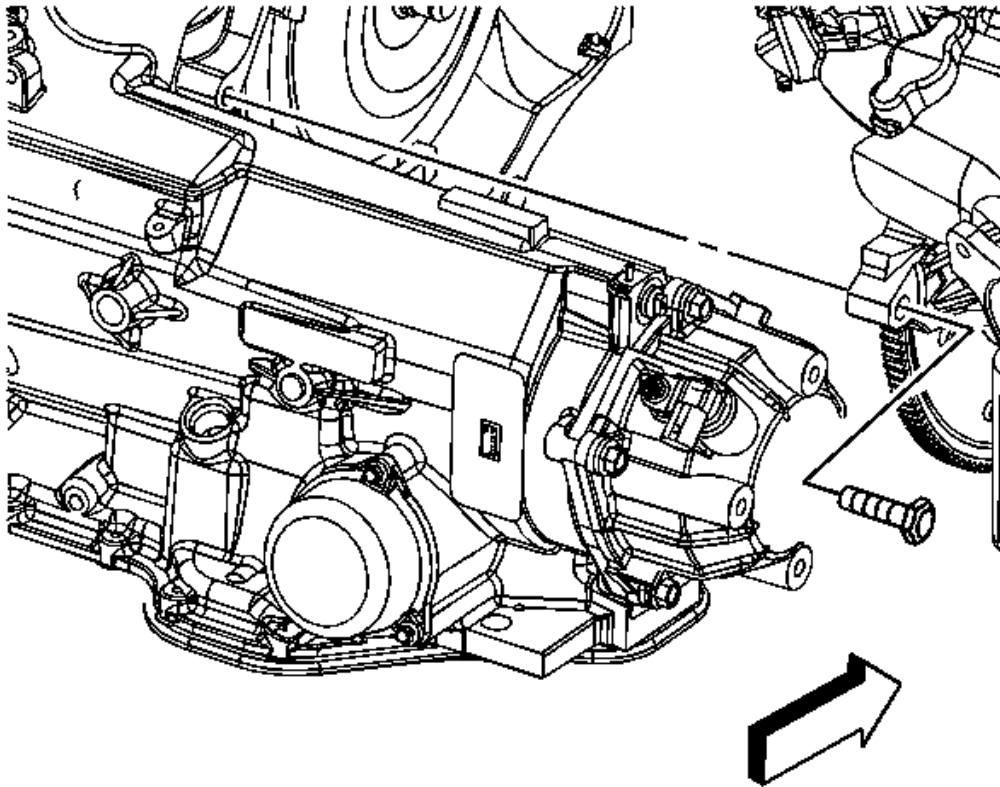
View Of Transaxle-To-Engine Lower Rear Bolt
